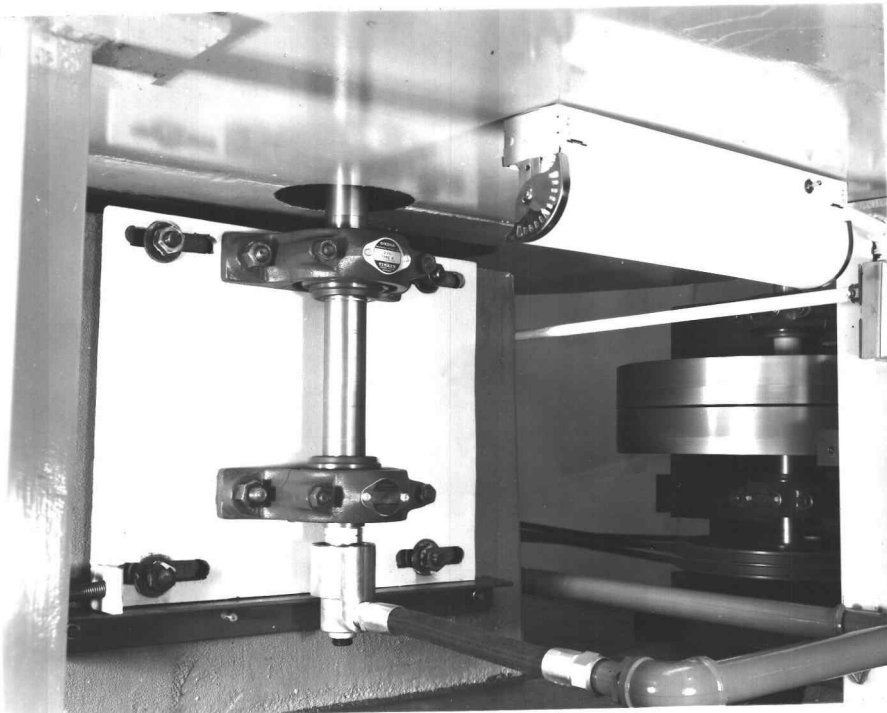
Photograph showing the mounting arrangement for the vertical shaft of the rotating assembly.
